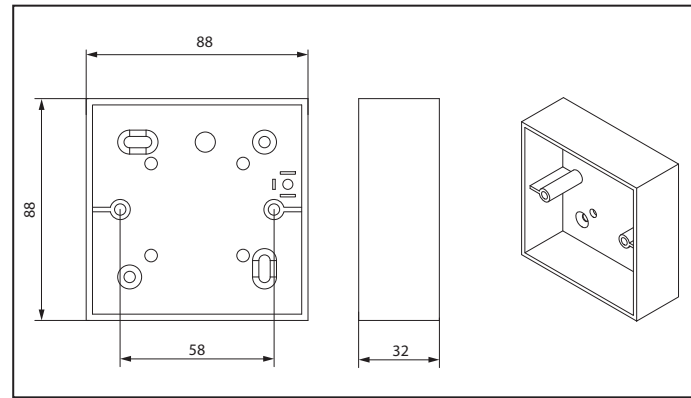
Overall dimensions of the mounting box for wall surface mounting
